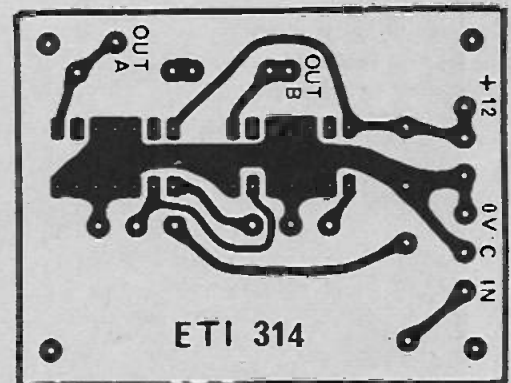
Printed circuit board. Full size 50 x 65 mm.
